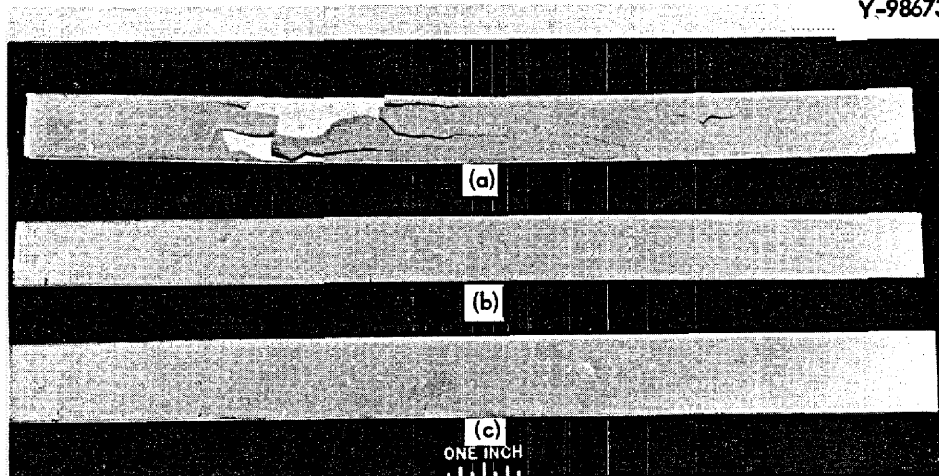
Typical Tungsten-Coated Specimens. (a) Type 430 stainless steel; coating cracked and separated. (b) Type 430 stainless steel; nickel-plated prior to coating. (c) Inconel 600.
